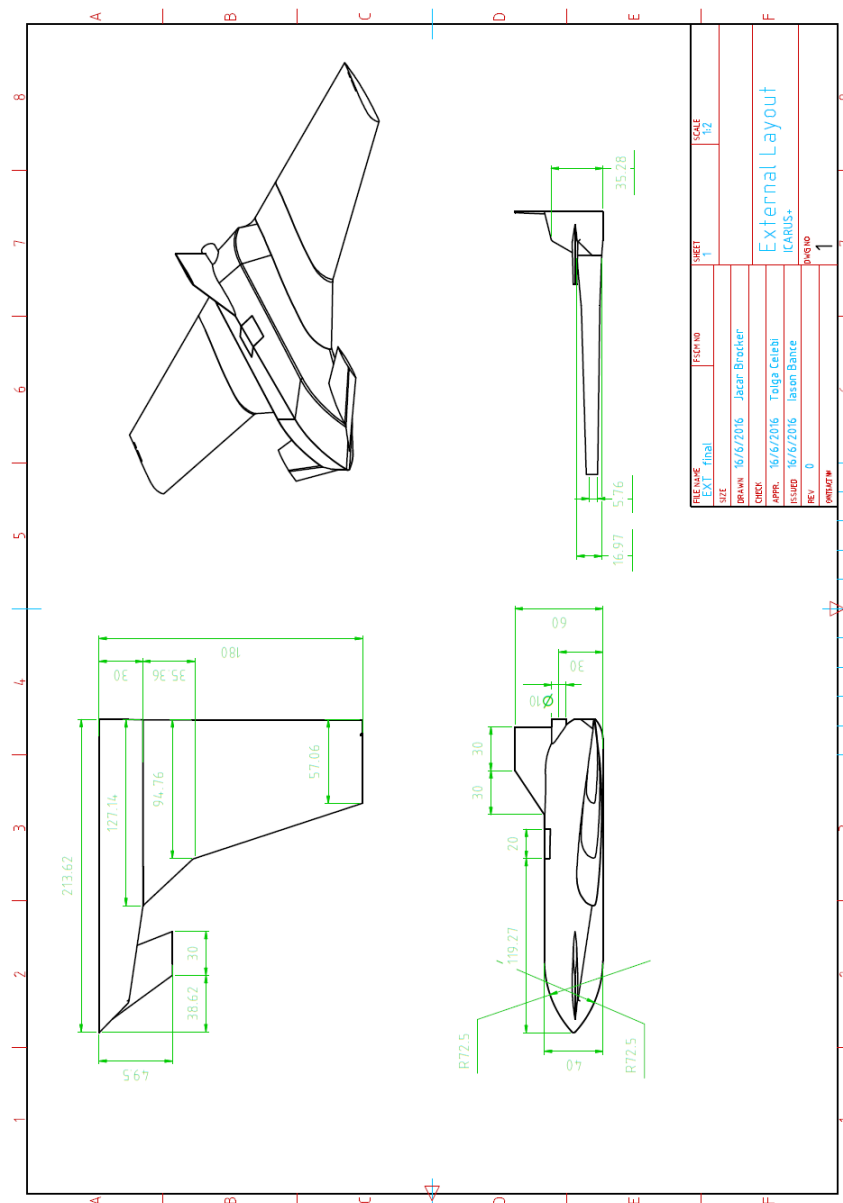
Technical drawing of the external lay-out of the ICARUS+.
